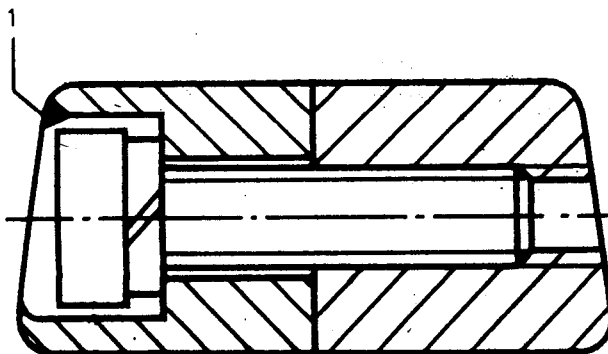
Locking the oil ring joint bolt by a punch mark 1
